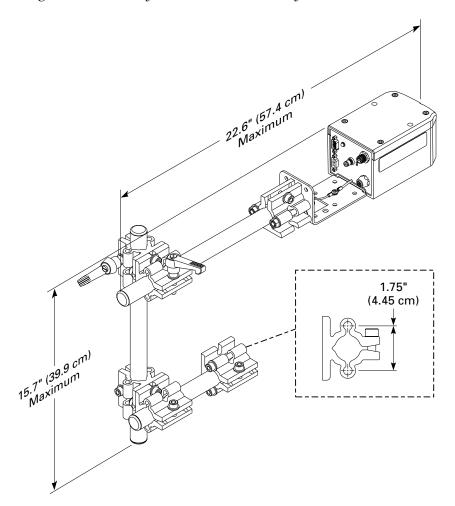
K: Standard VJ Printhead Bracketry Dimensions
